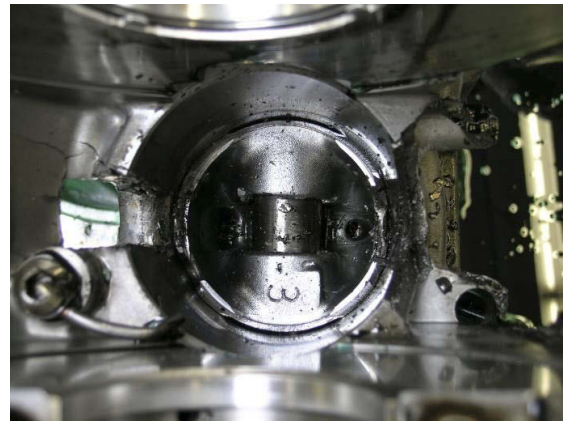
Cylinders and piston no. 3 after the crankshaft and the connecting rod had been removed.
